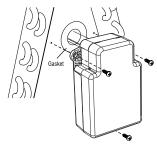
Insert assembly into delta plate knockout and secure with screws.
